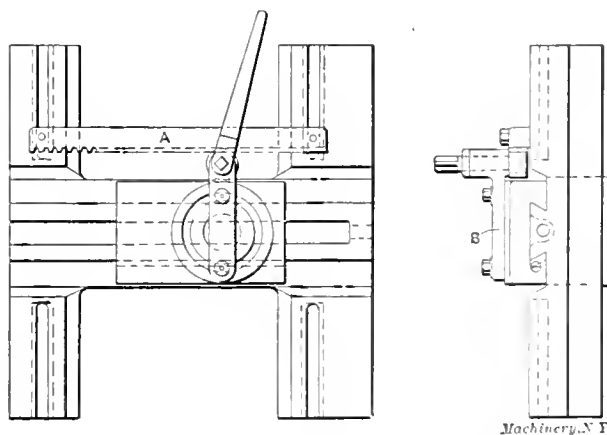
Method of Attaching Rack and Pinion to a Lathe Rest.
